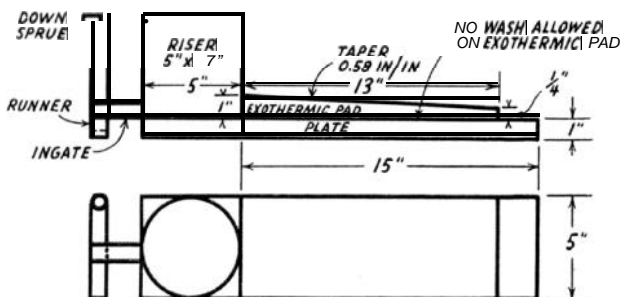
Sketch of test plate with exothermic pad giving dimensions of plate, exothermic pad, and riser. Gate location indicated.
